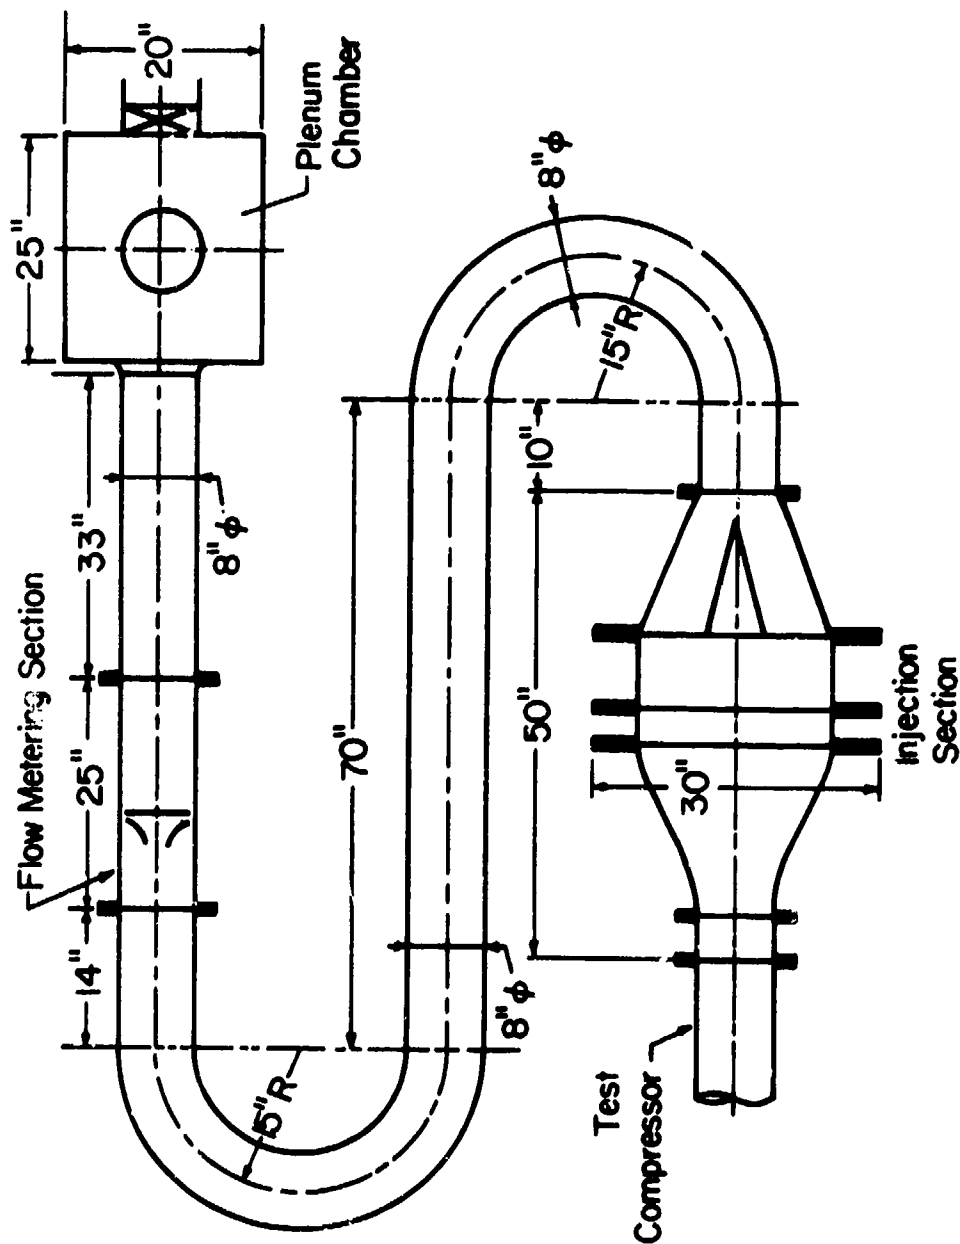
Air Supply Ducting from Plenum Chamber to Test Compressor
